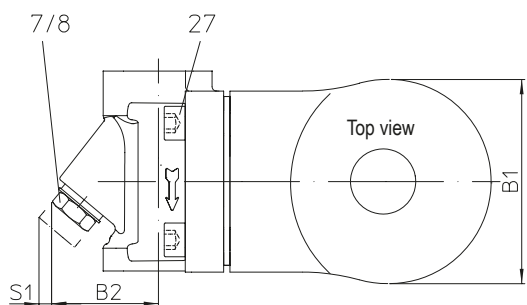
2 (ANSI300) with screwed sockets - horizontal installation
